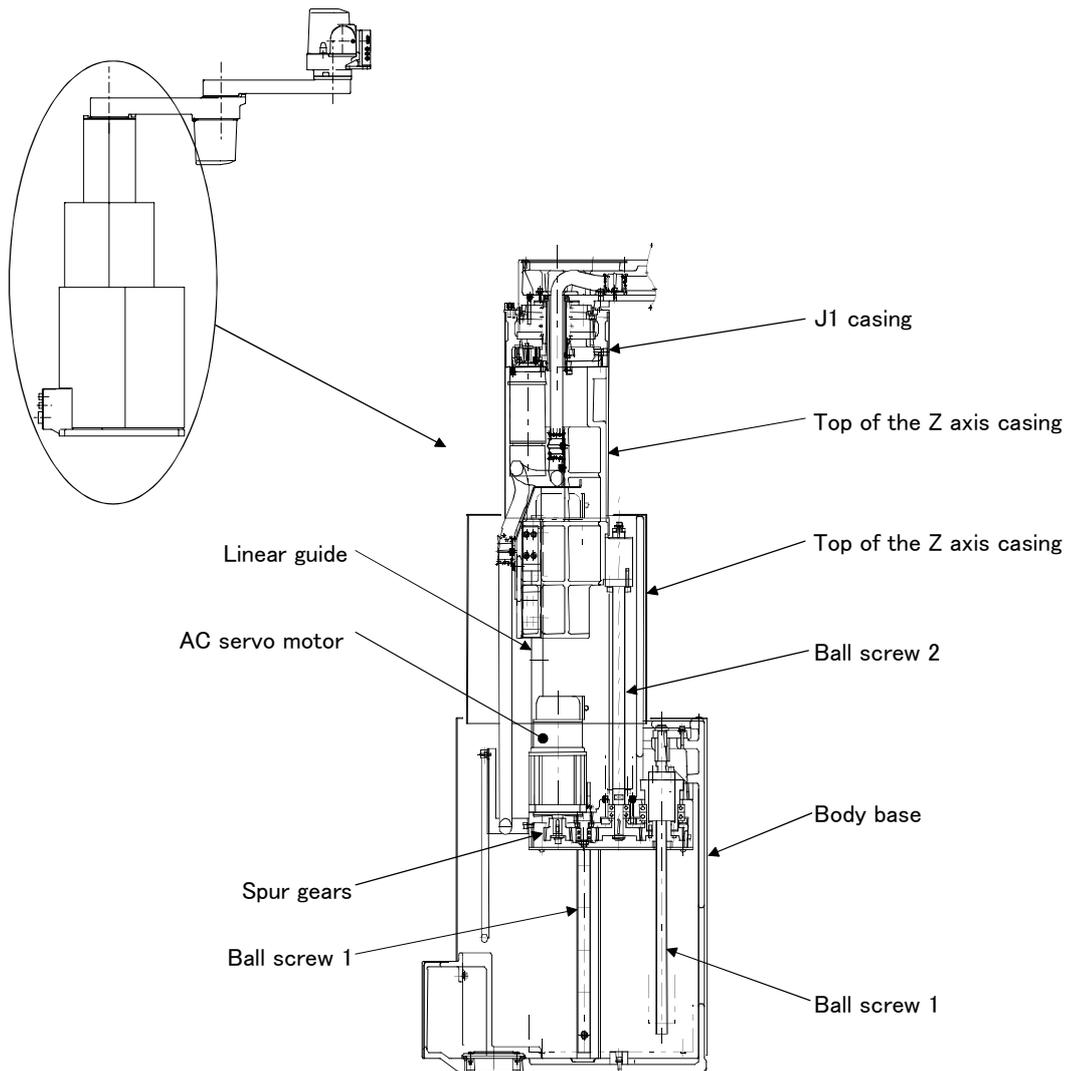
J3 axis (vertical axis) drive mechanism (RH-1000GHDC-SA/GJDC-SA)
